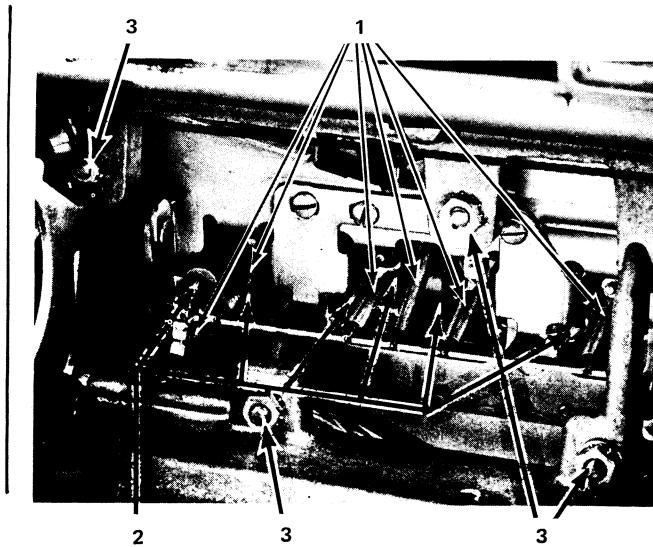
Differential Bracket Removal (Rear of Printer, Motor Removed)
